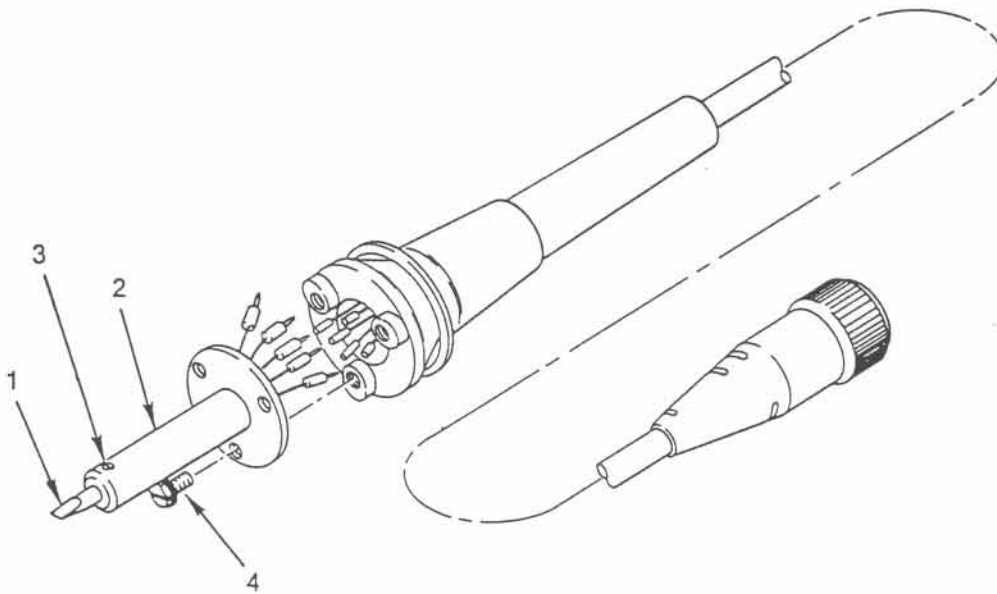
REPLACEMENT PARTS FOR IR-65 SOLDERING IRON HANDPIECE ASSEMBLY
